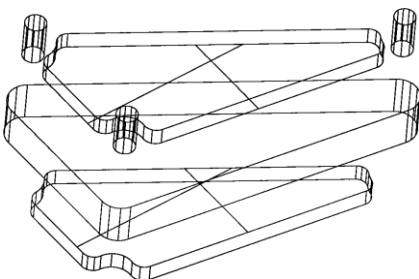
WIRE FRAME RENDERING OF REVERSE ENGINEERED STEERING ARM.
